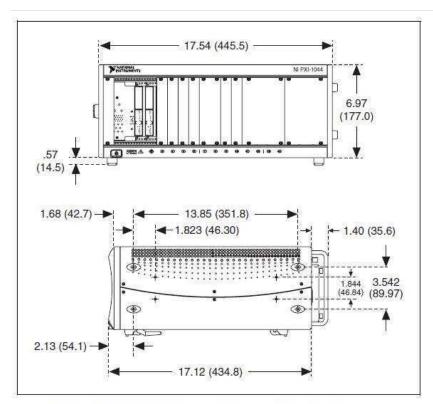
PXI-1044 Dimensions (Front and Side) in Inches (mm)
